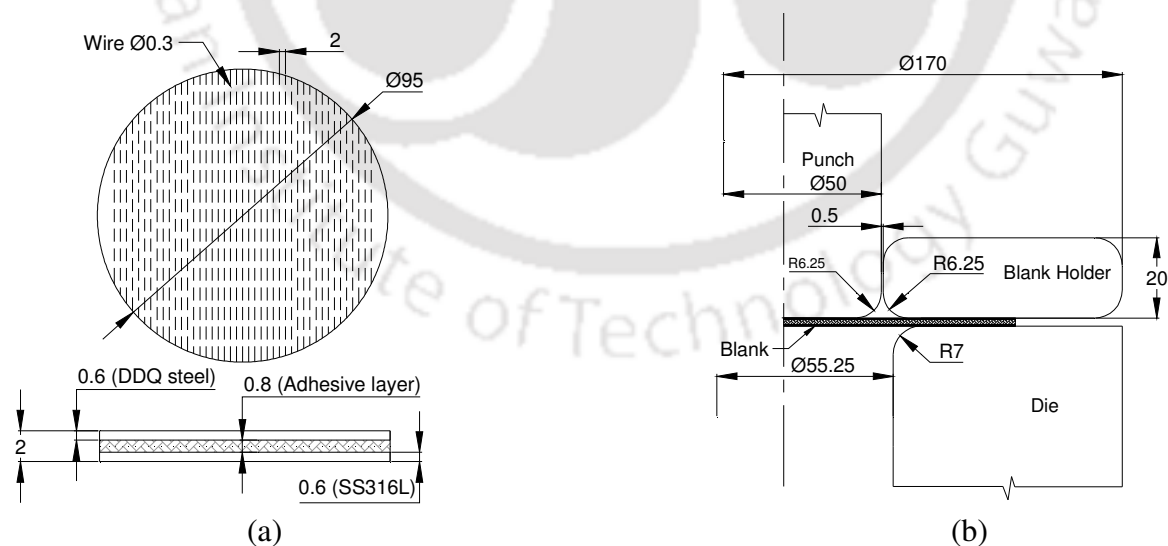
(a) Wire reinforced adhesive bonded circular sheets, and (b) Schematic of deep drawing tools used in experiment (All dimensions are in ‘mm’)
